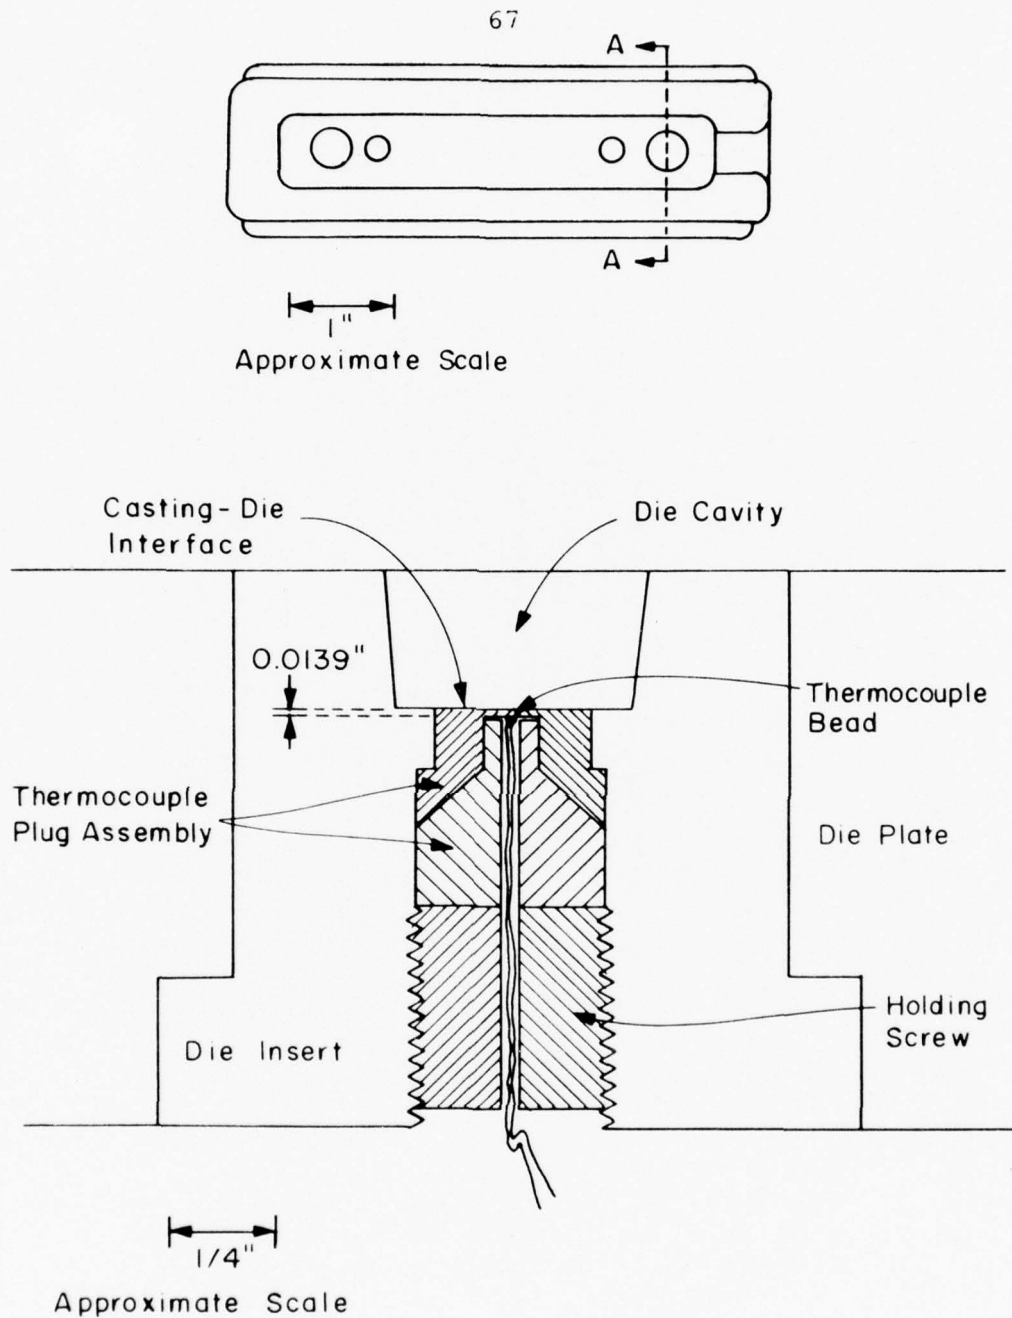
Schematic of die cavity used for thermal measurements. Top: Plan view of moving die-half insert. Bottom: Cut-away view at section A-A of above showing details of thermocouple assembly.
